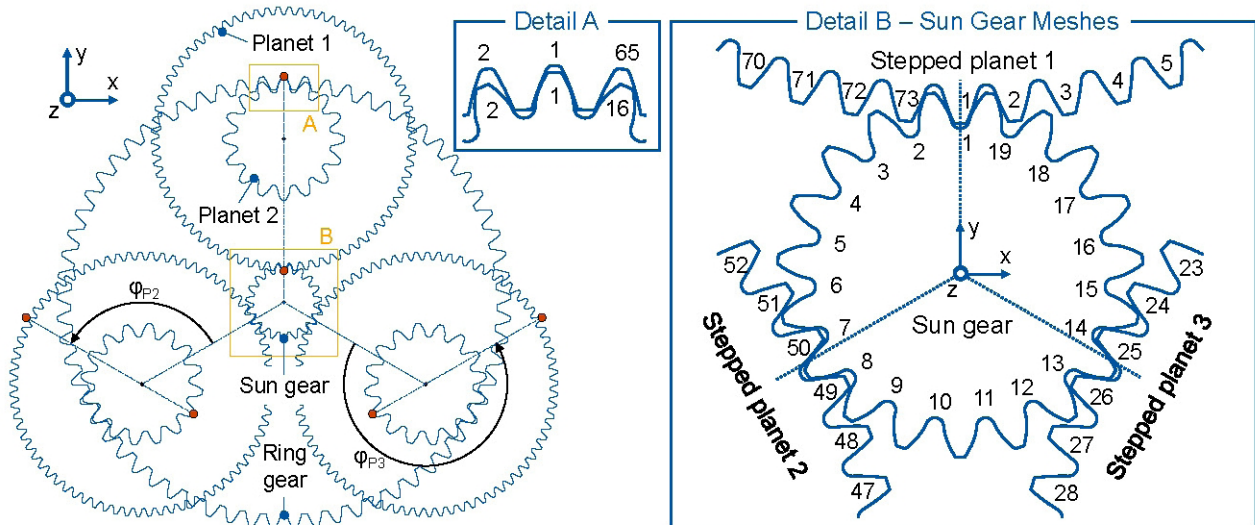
Sketch of the Stepped Planetary Gear Stage in Assembly Position
